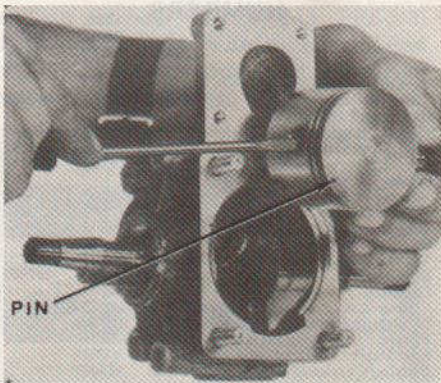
Ring locating pin must be away from exhaust port side of cylinder as shown, when installing the piston to the connecting rod.
